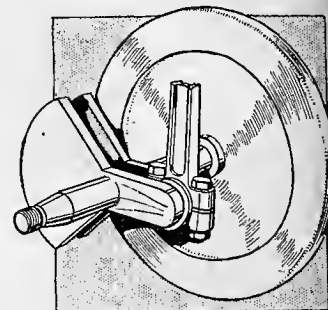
Crankshaft and connecting rod of an outside flywheel engine.
